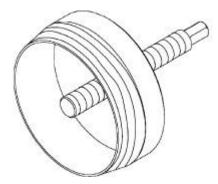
REMOVER, SEAL - 8506 Courtesy of CHRYSLER LLC
